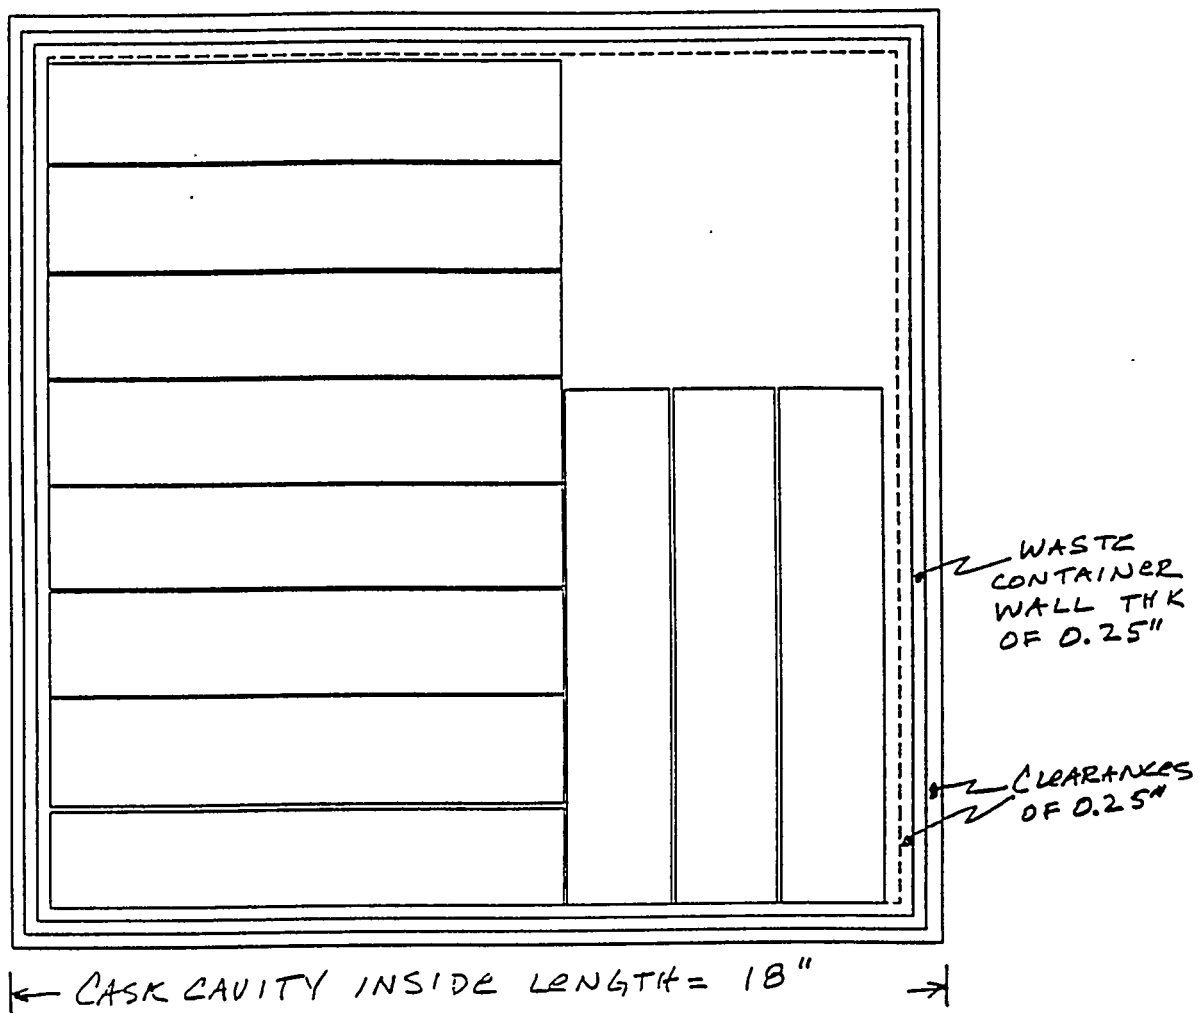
Arrangement of BWR control rod blades in a square cross section waste container.
